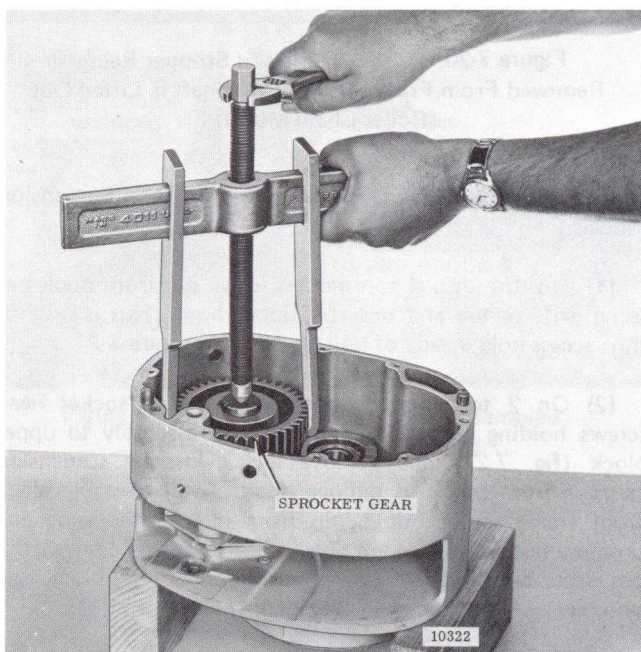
Pulling Sprocket Gear from Sprocket Shaft Using Common Puller
